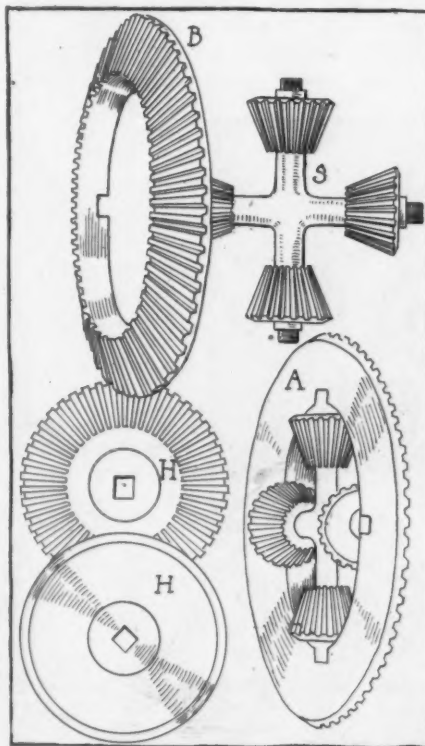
PARTS OF THE ORDINARY DIFFERENTIAL GEAR
